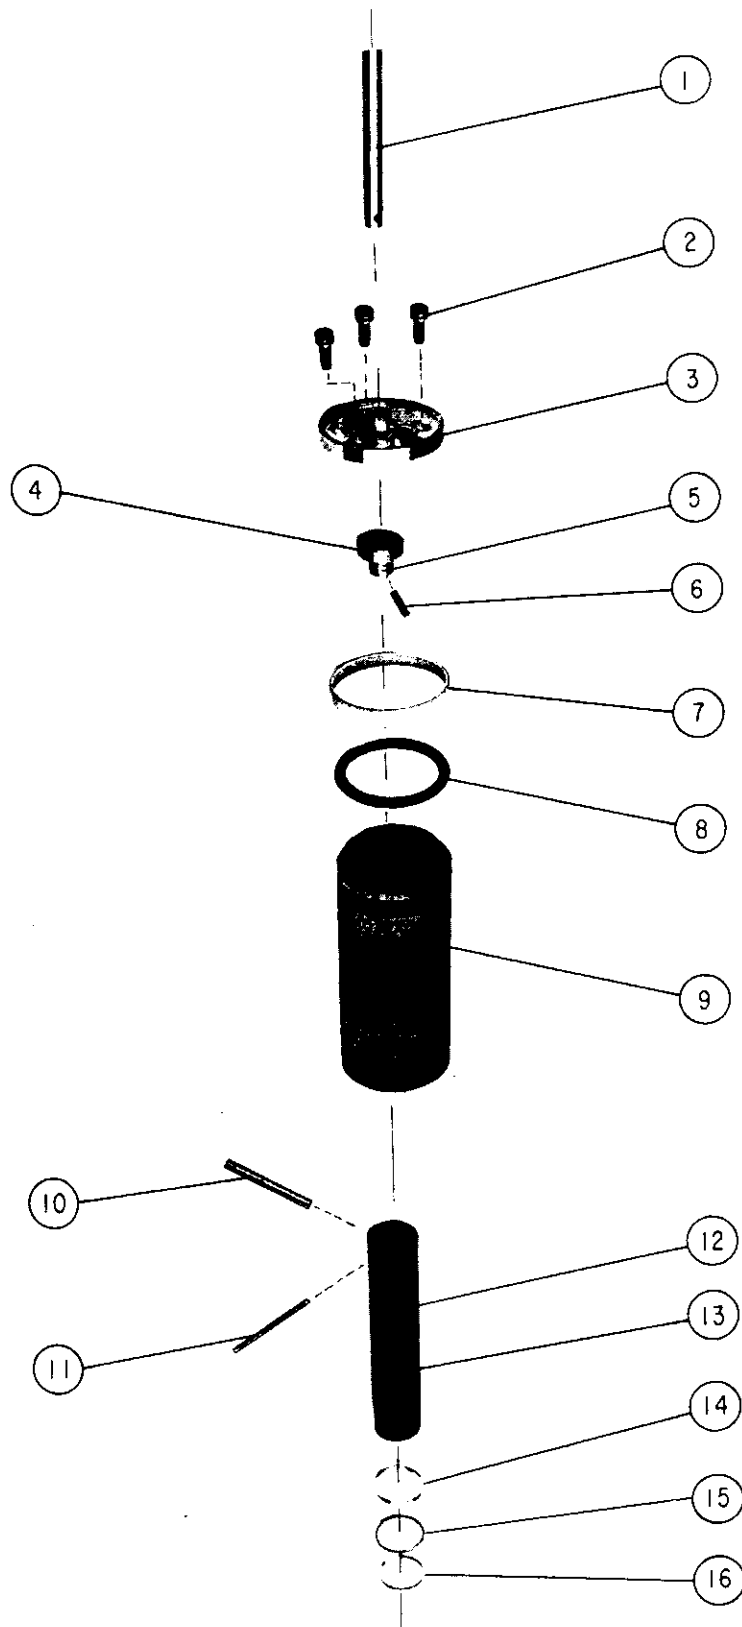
EXPLODED VIEW OF THE DISPLACER ASSEMBLY
